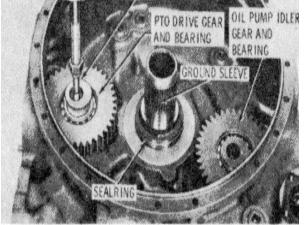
Removing PTO Drive Gear Spindle SEPARATING CONVERTER HOUSING AND RETARDER HOUSING AND REMOVING RELATED PARTS. Separate housings as follows:
